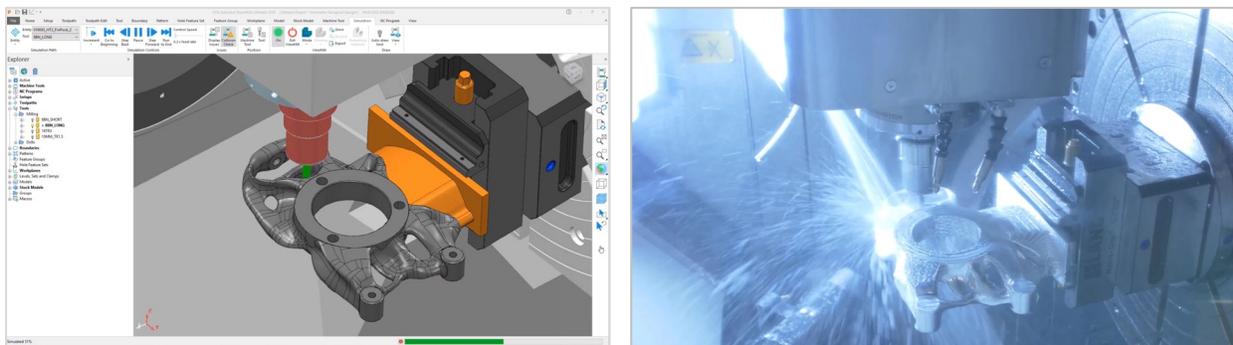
CAM Programming in PowerMill, and the Part on the Machine
